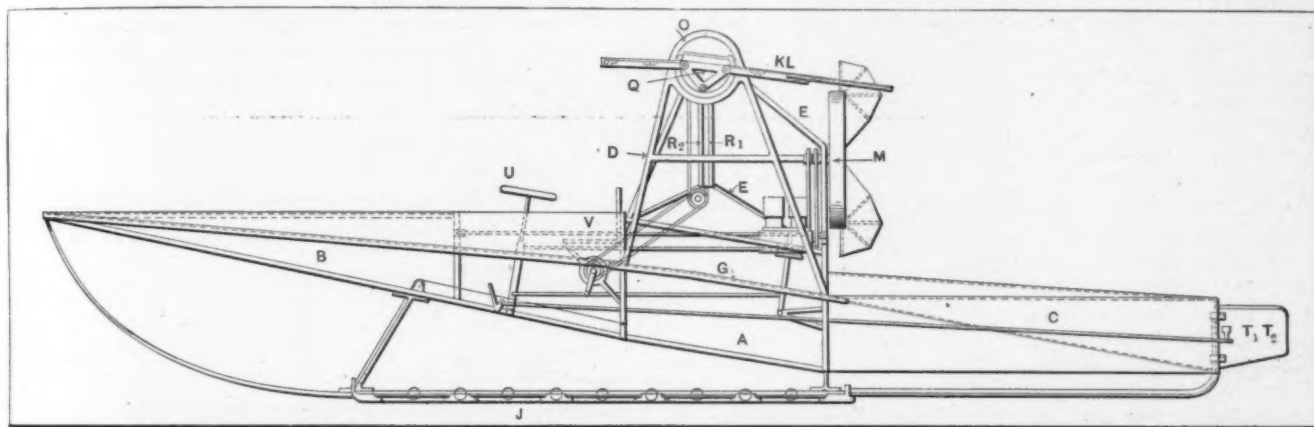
Side view of machine with large upper adjustable wings and smaller fixed lower wings. A, body; B, prow; C, tail; D, left wing support; E, central control base; F, right wing support; G, H, lower wings; J, skid; K, L, upper wings; M, propeller; N₁, N₂, control levers; O₁, O₂, guard over trunnioned bearing ring; P₁, P₂, stays; Q, triangulated axis of wings; R₁, R₂, central slides; S₁, S₂, motors; T₁, T₂, oblique rudders; U, steering post; V, seat
